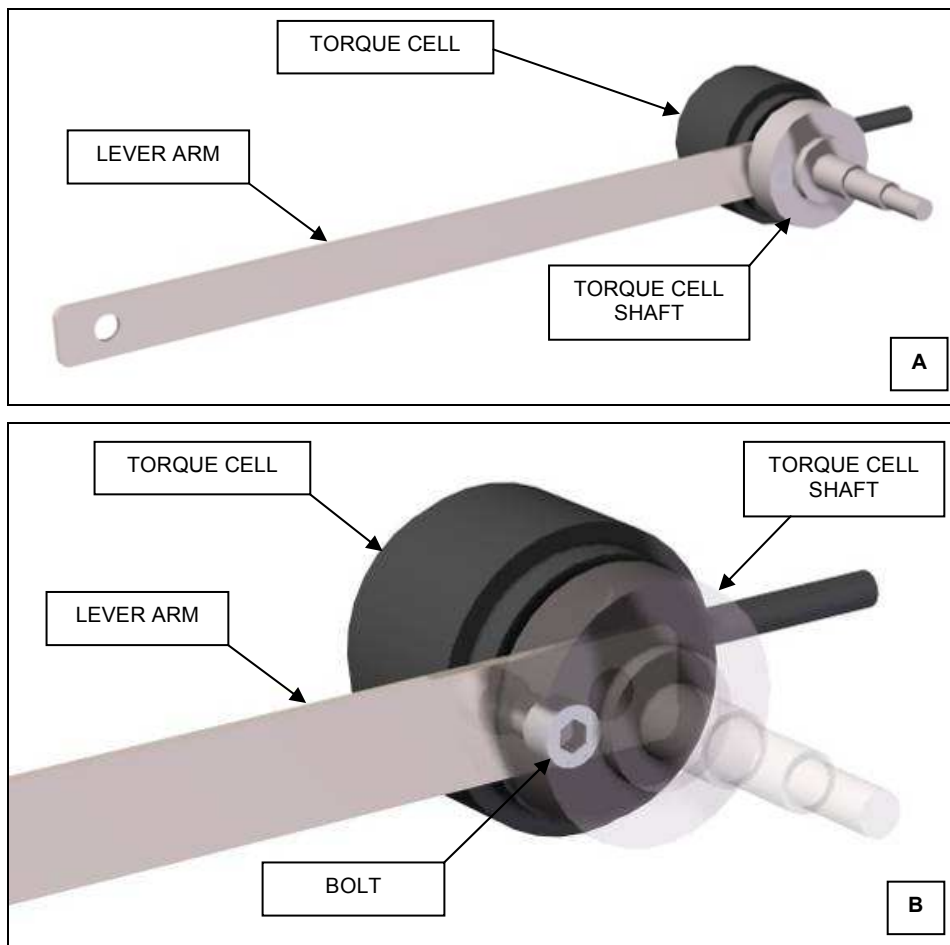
Diagram of lever arm attachment showing the complete lever arm (A) and a zoomed view of the attachment (B)
